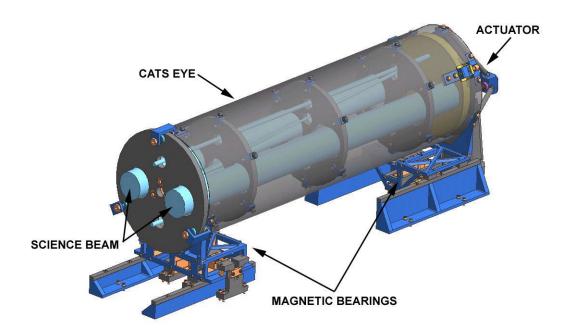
Magnetic Bearing Optical Delay Line for PRIMA and GENIE
